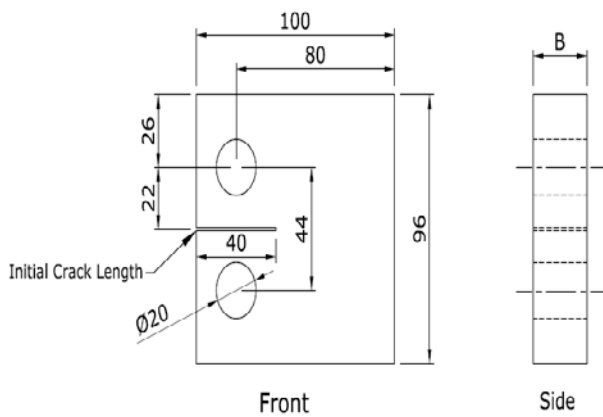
ASTM standard pre-cracked Compact Tension (CT) specimen.
